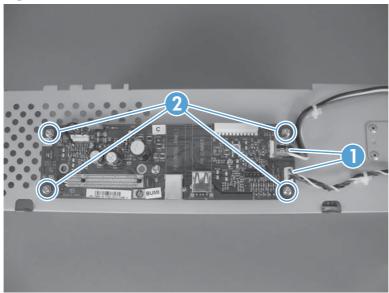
Remove the interconnect PCA, fan assembly, and DC connector PCA (6 of 6)
